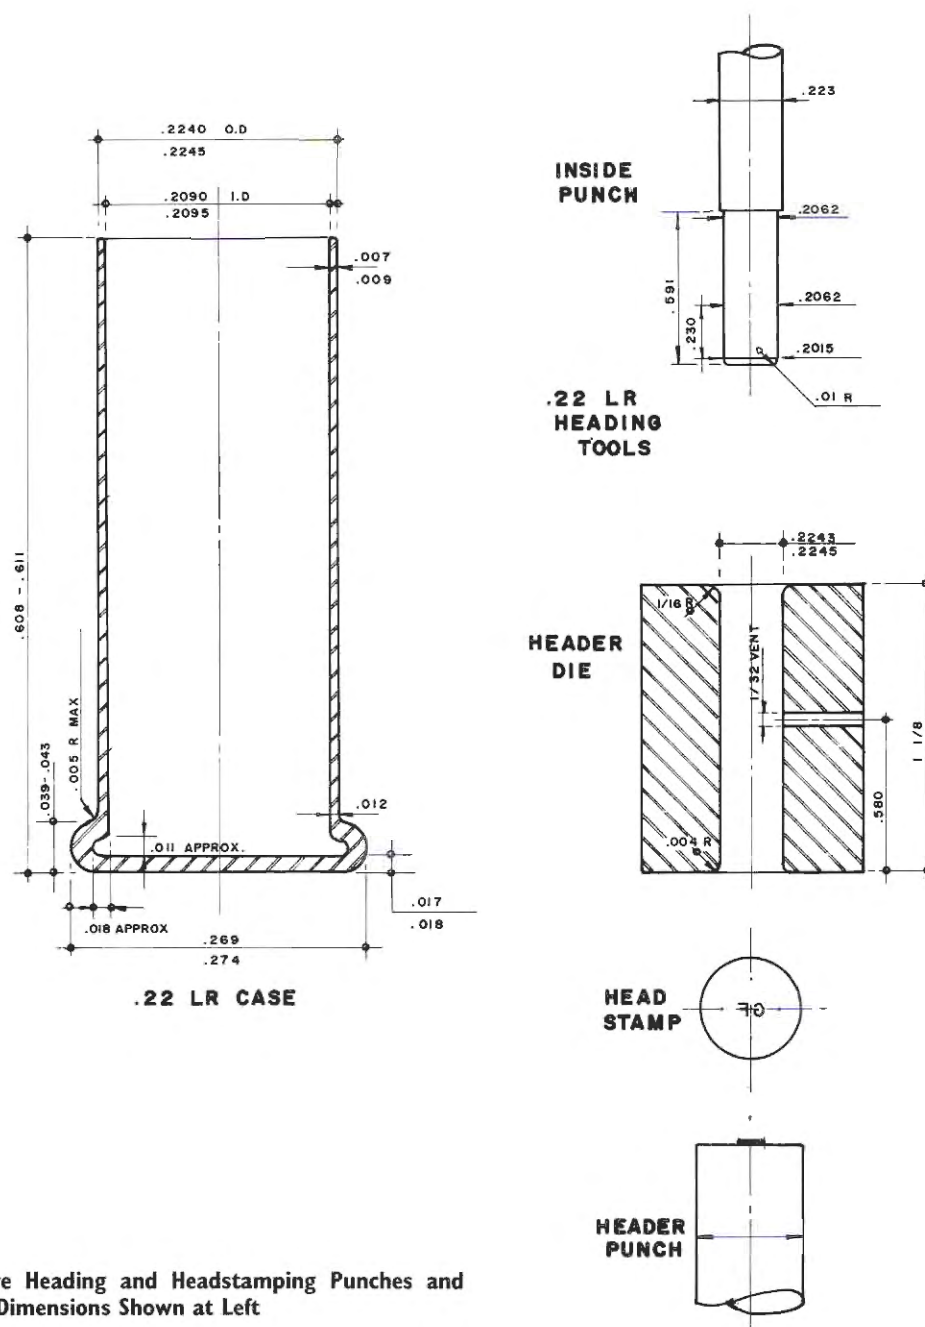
Rimfire Heading and Headstamping Punches and Dies. Head Case Dimensions Shown at Left
